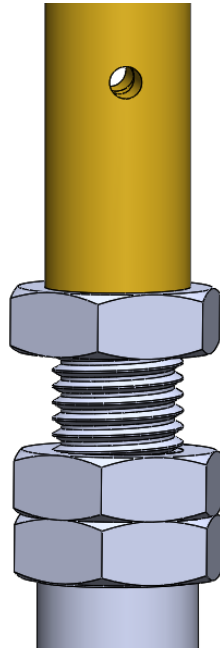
Connection between T-shaft and hollow shaft in swivel.
